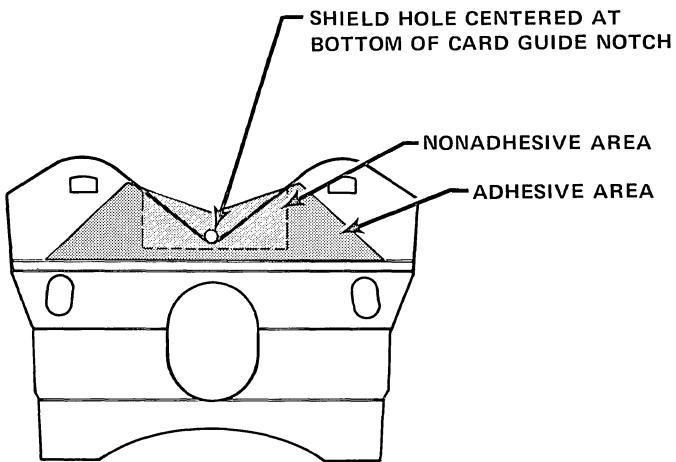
ECS CARD GUIDE SHIELD REPLACEMENT
